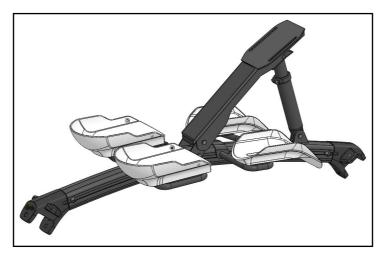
Manufacturable Design; Seat post and arm Source: Exero [7]
